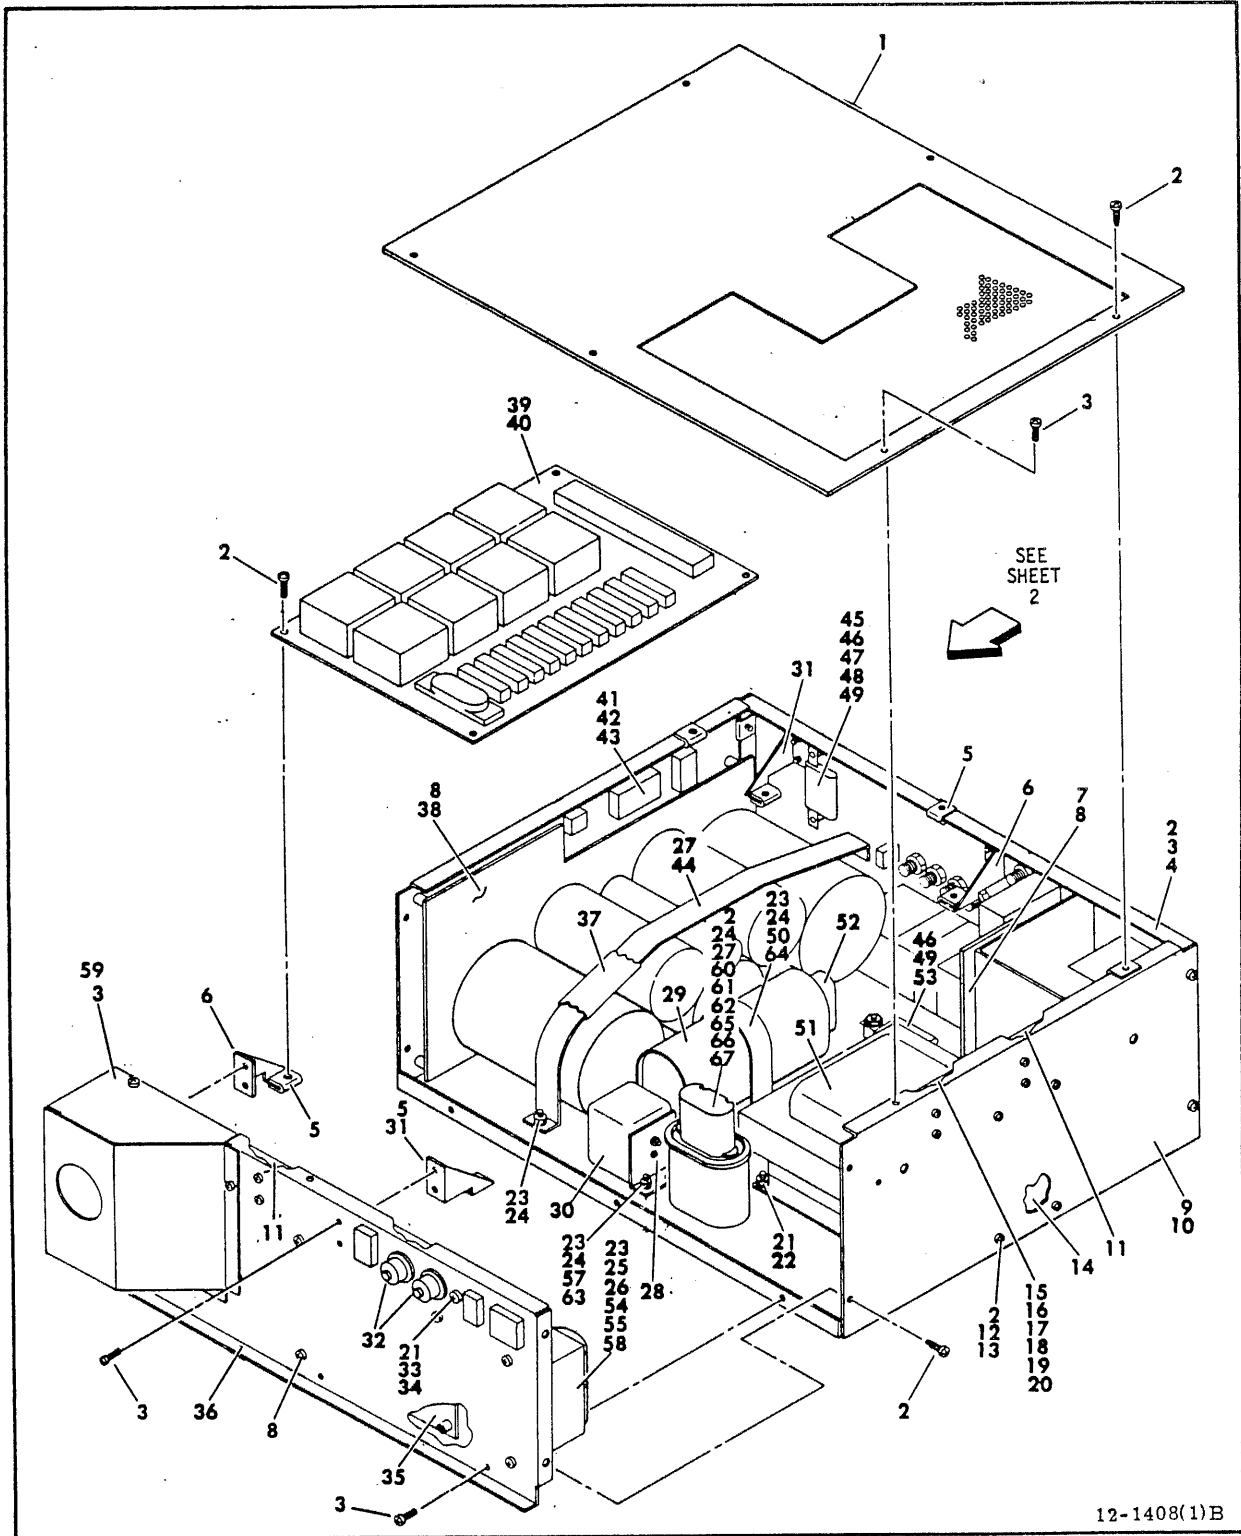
A-17. Power Supply Assembly Rear (VDE)
